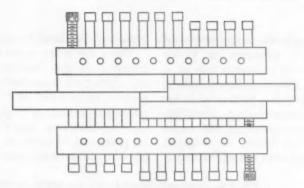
D. Self-adjusting die for low production of rectangular shaped blanks.
